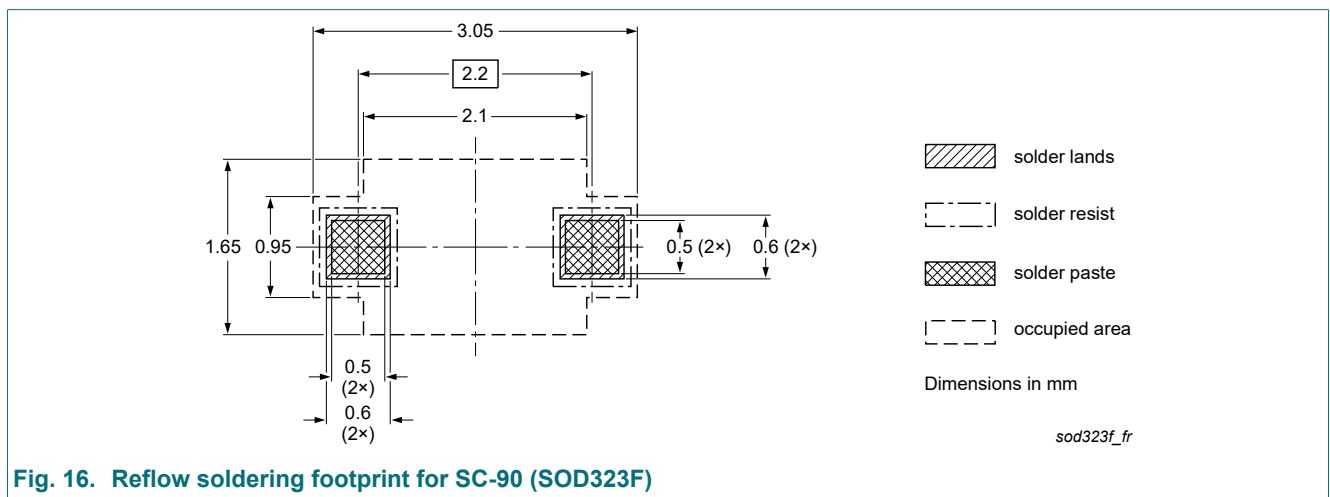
Reflow soldering footprint for SC-90 (SOD323F)
